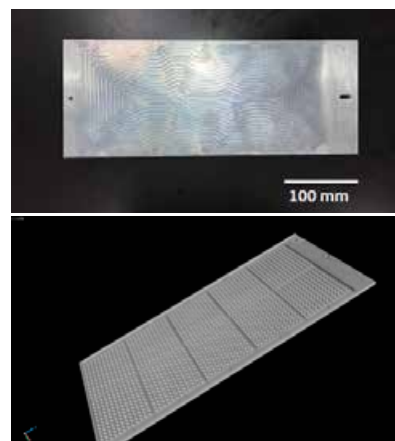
Example of a large component fabricated using this diffusion bonding technique with conventional brazing. Photograph and X-ray CT images are shown (Courtesy Ricoh)
